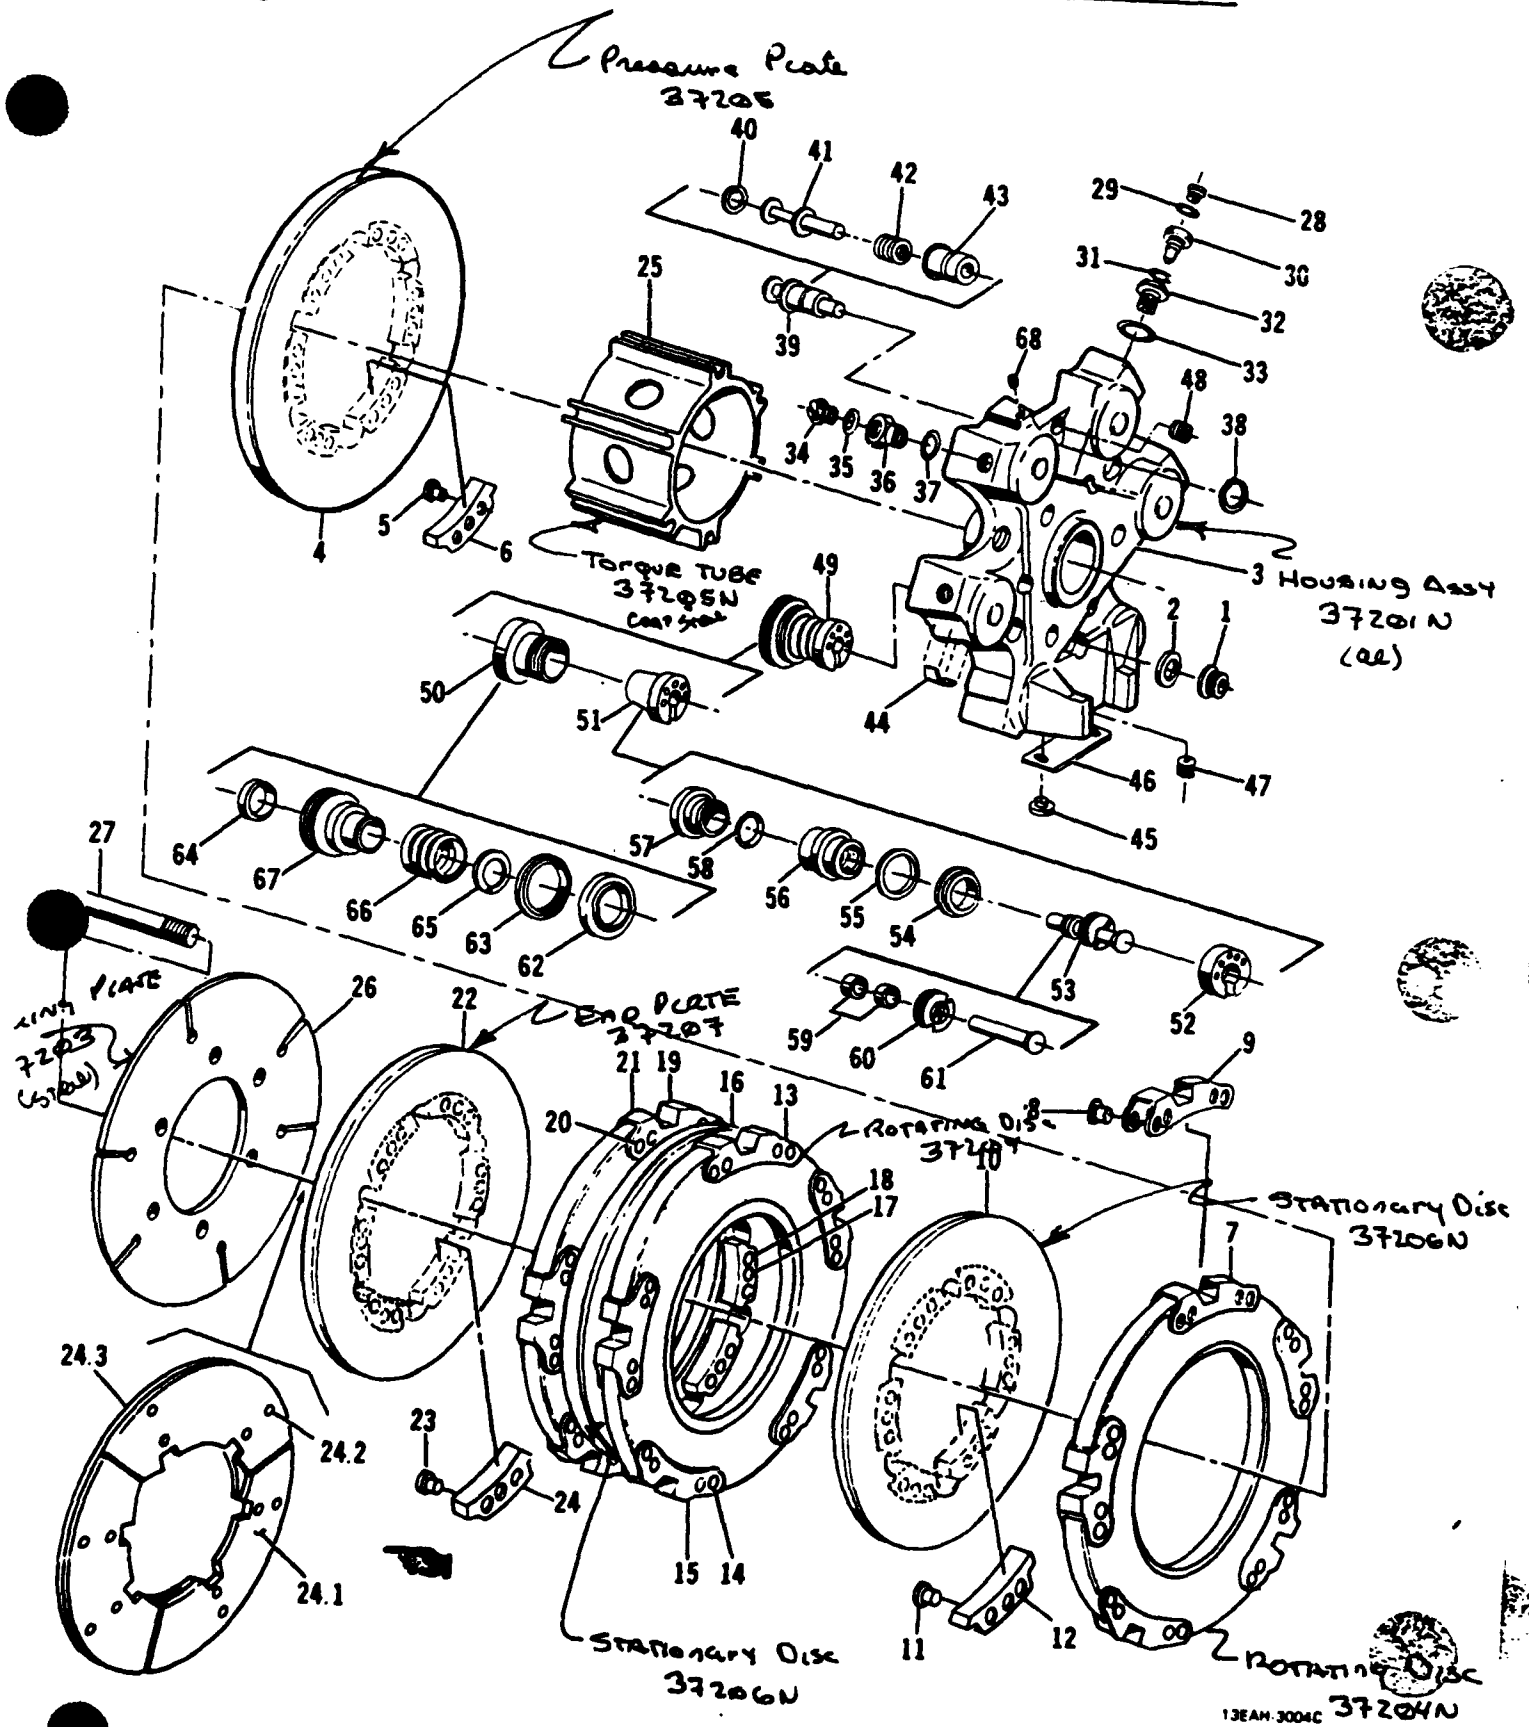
Brake Assembly Exploded View (Sheet 1)
